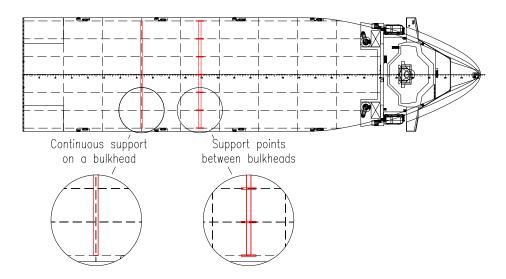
Difference in support arrangement and thus unsupported beam length between position on a bulkhead (left detail) and not on a bulkhead (right detail)
